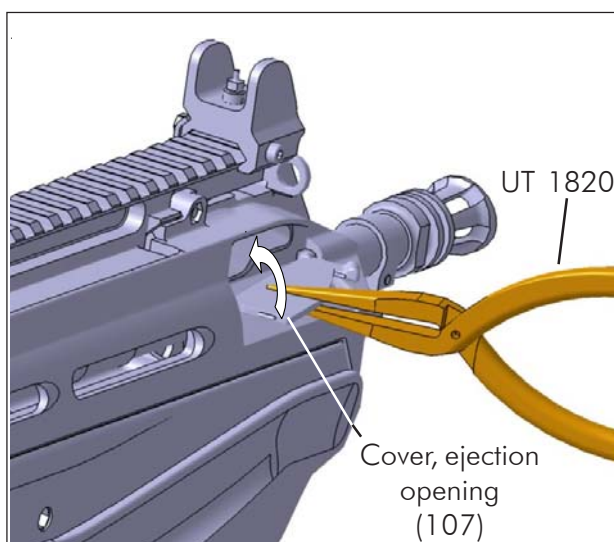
ap - Reassembly of the cover, ejection opening (107)
